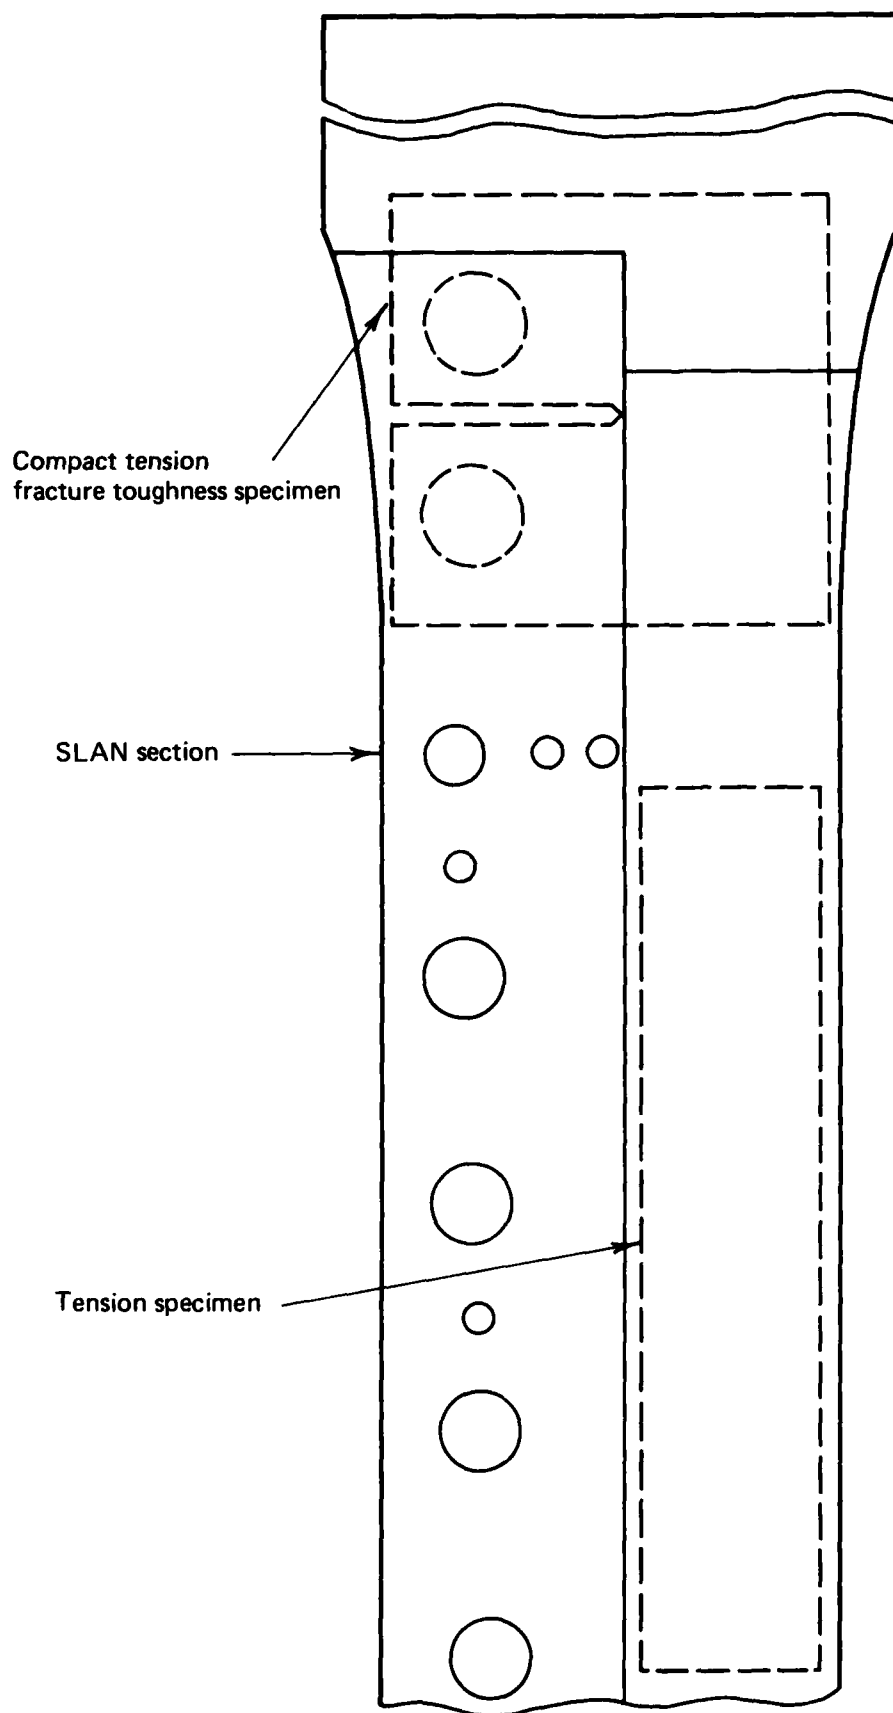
LOCATIONS OF TENSION AND FRACTURE TOUGHNESS SPECIMENS
